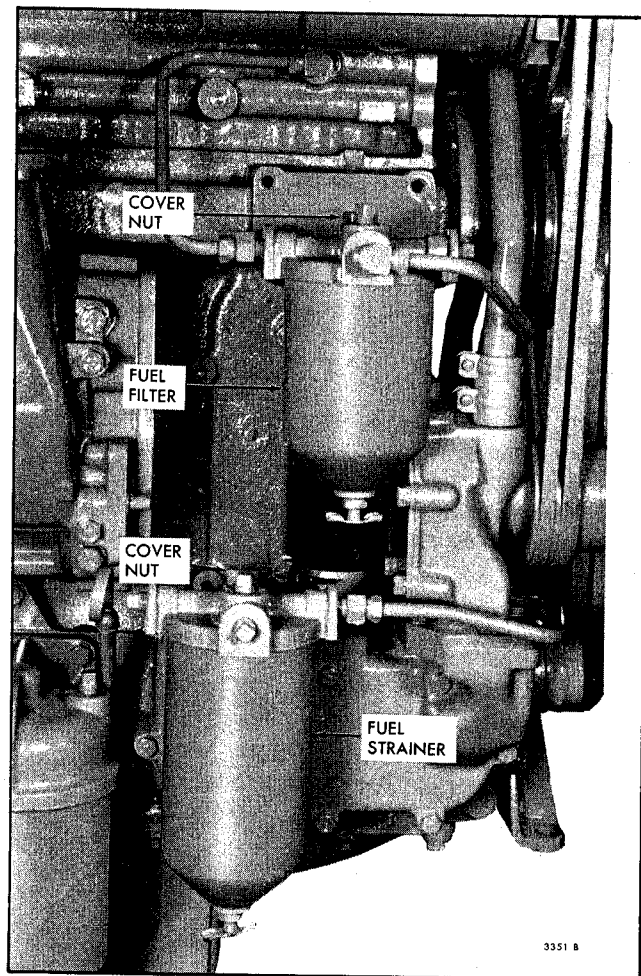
Typical Fuel Strainer and Filter Mounting
